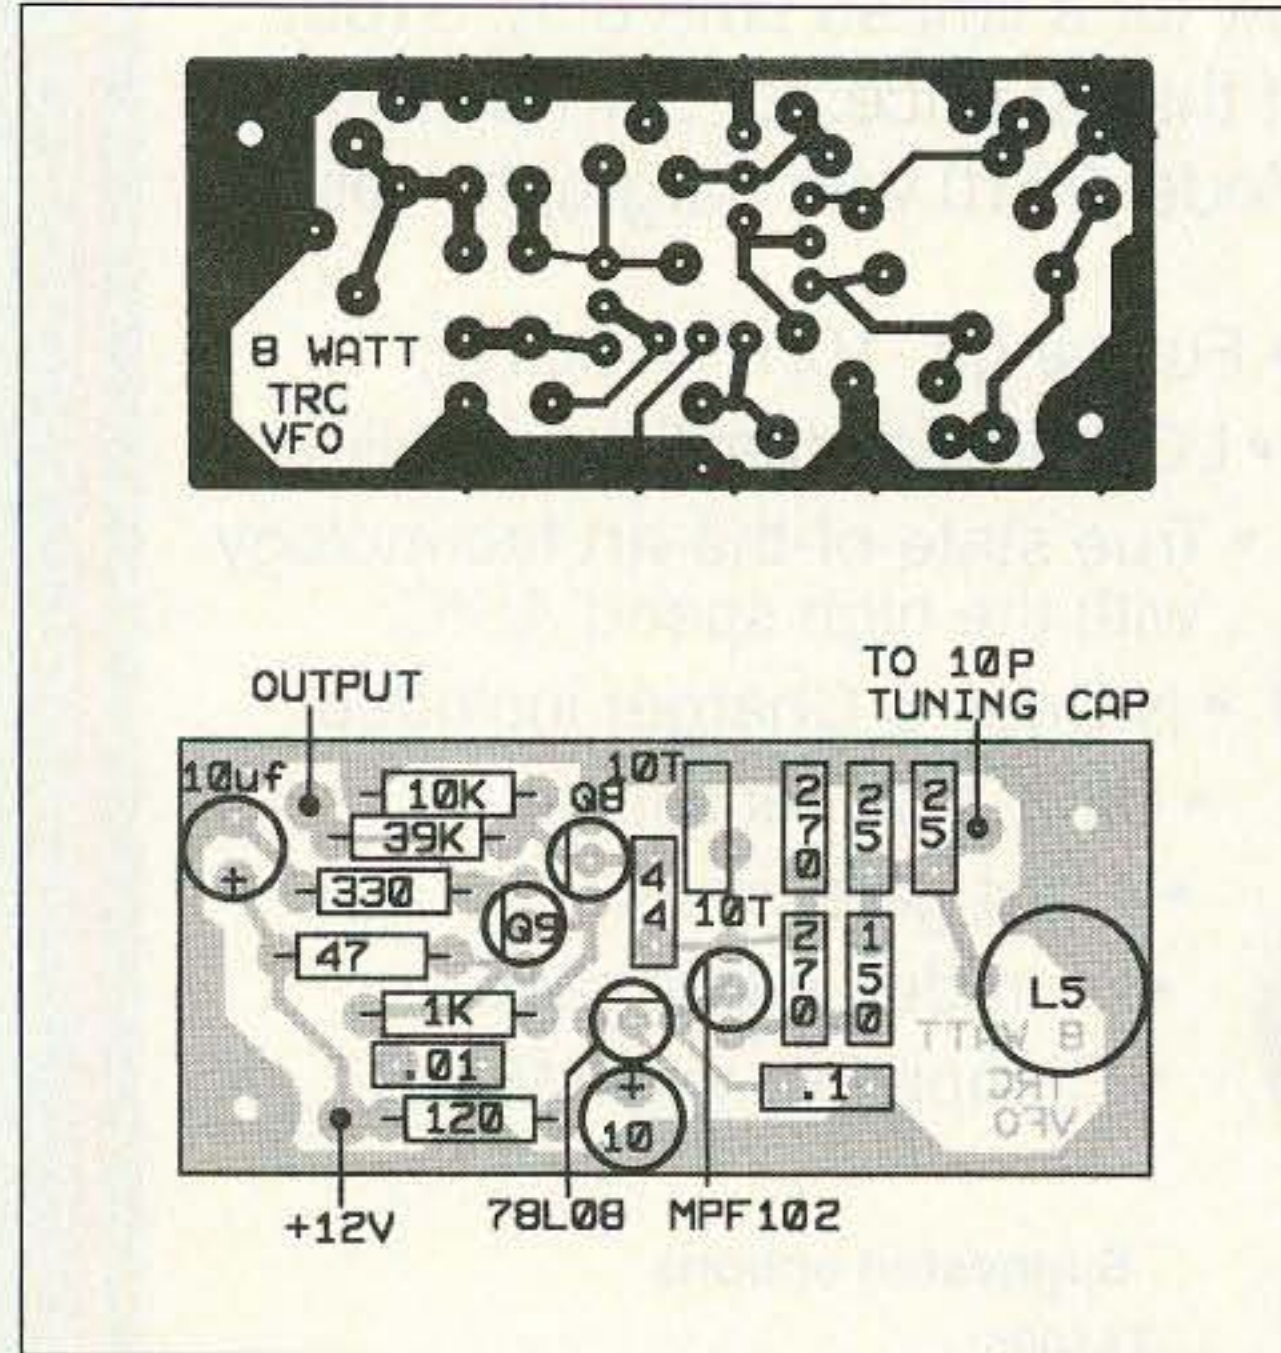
a. PC board foil pattern for the VFO board. b. Parts placement.
